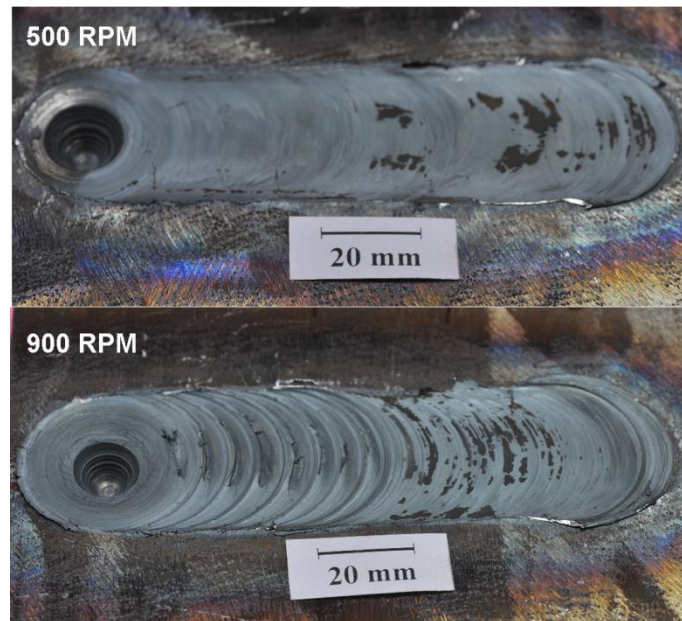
Macrograph of bead- on- plate friction stir weld at 500 and 900 rpm condition.
